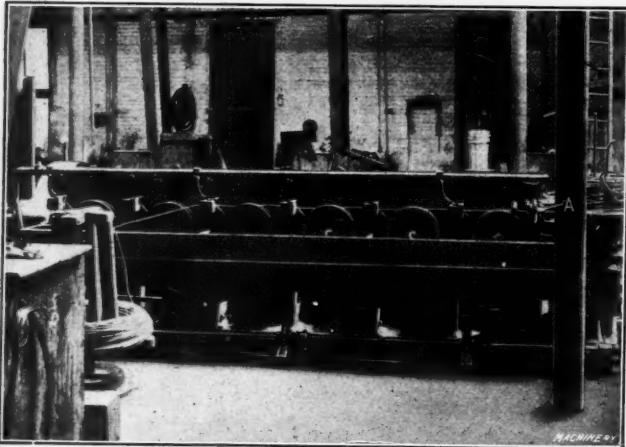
A Machine known as "Bull-block," used for Heavy Sizes of Copper and Brass Wire
